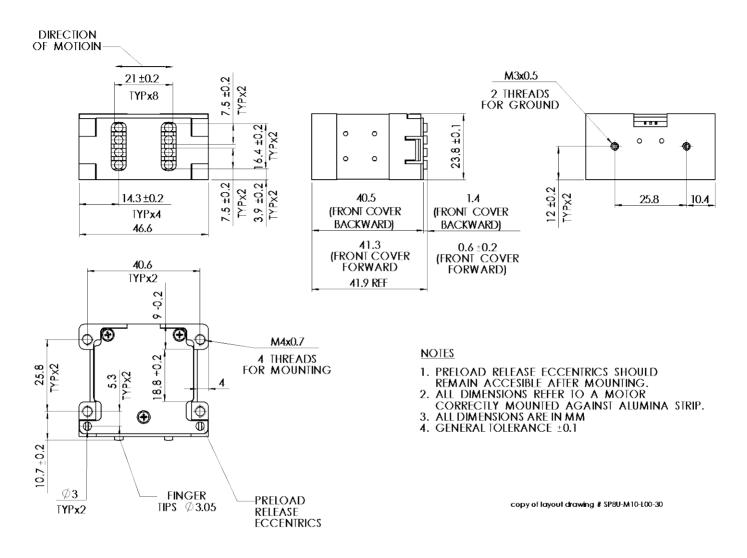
Dimensions for Ultra-High-Vacuum Motor
